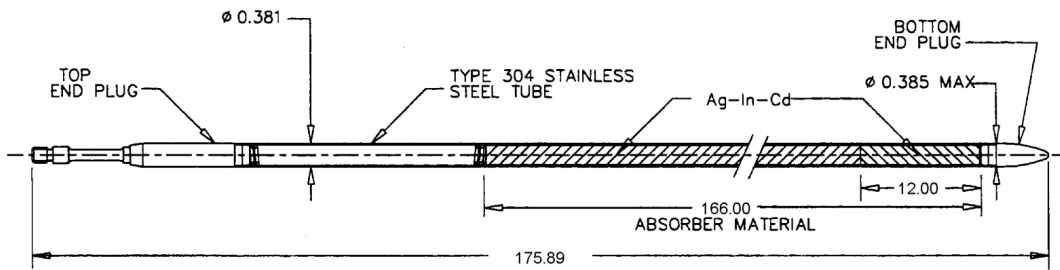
AP1000 Absorber Rod, dimensions in inches [17]
